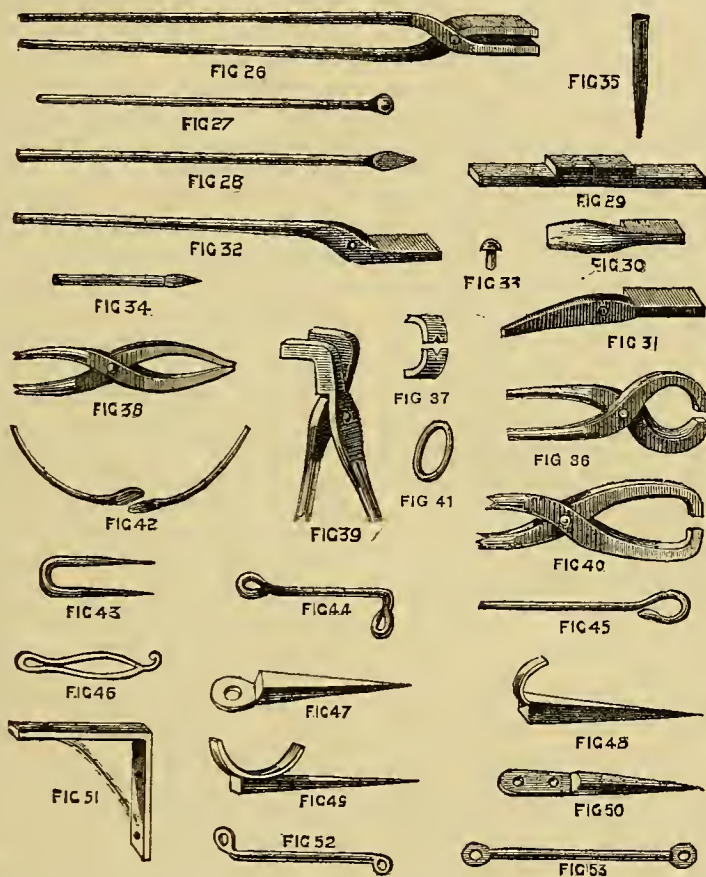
FLAT BIT TONGS. FIG. 27.—ROD FOR HANDLE OF TONGS, UPSET AT ONE END. FIG. 28.—SCARFED END OF ROD. FIG. 29.—BITS OF TONGS FORGED ON BAR OF IRON. FIG. 30.—BIT HALF FORMED. FIG. 31.—BIT FORGED AND TAPERED. FIG. 32.—HALF OF TONGS COMPLETED. FIG. 33.—RIVET. FIG. 34.—IRON FOR RIVET. FIG. 35.—PUNCH. FIG. 36.—PINCER TONGS. FIG. 37.—NOTCH IN JAWS OF PINCER TONGS. FIG. 38.—SMITHS' PLIERS. FIG. 39.—CROOK BIT TONGS. FIG. 40.—HAMMER TONGS. FIG. 41.—LINK. FIG. 42.—PART OF BROKEN HOOP SCARFED FOR WELDING. FIG. 43.—STAPLE. FIG. 44.—HASP. FIG. 45.—LOOP OF HASP. FIG. 46.—BOW HASP. FIG. 47.—HOLDFAST. FIG. 48.—HOOK HOLDFAST. FIG. 49.—CRUTCH HOLDFAST. FIG. 50.—PIN HOLDFAST. FIG. 51.—BRACKET. FIGS. 52, 53.—STAYS.
